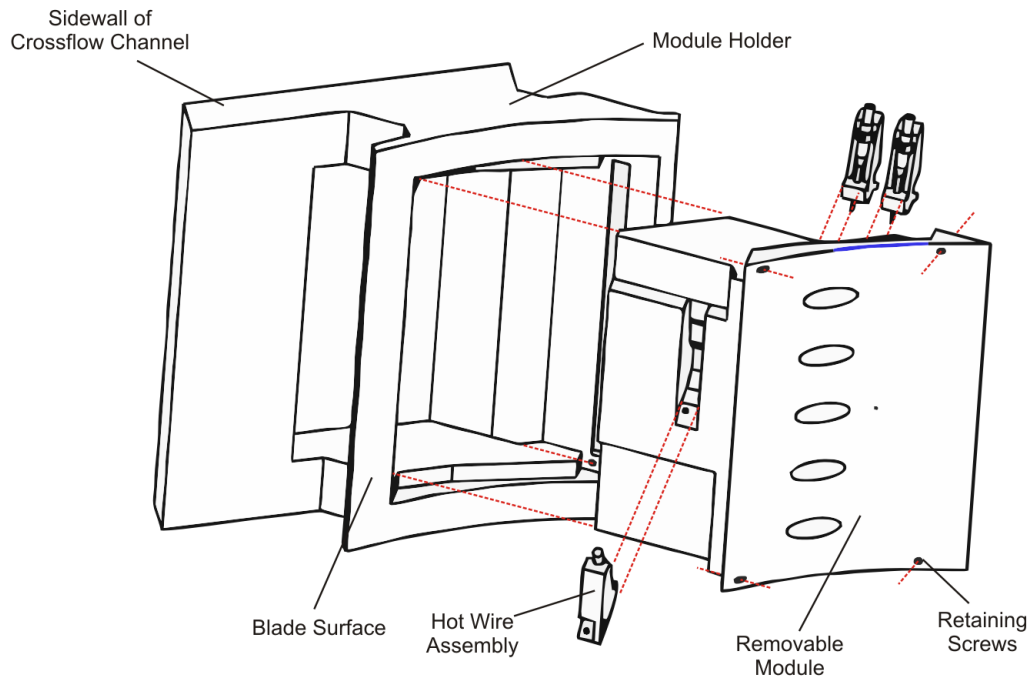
The modified removable cooling hole module to allow hot wire measurements inside the cooling hole tube.
